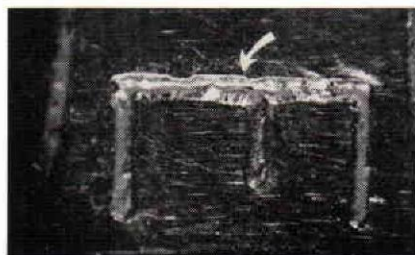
Cracking Beginning in Letter "E" of Name Stamp. This Crack would soon have caused failure. At right.
